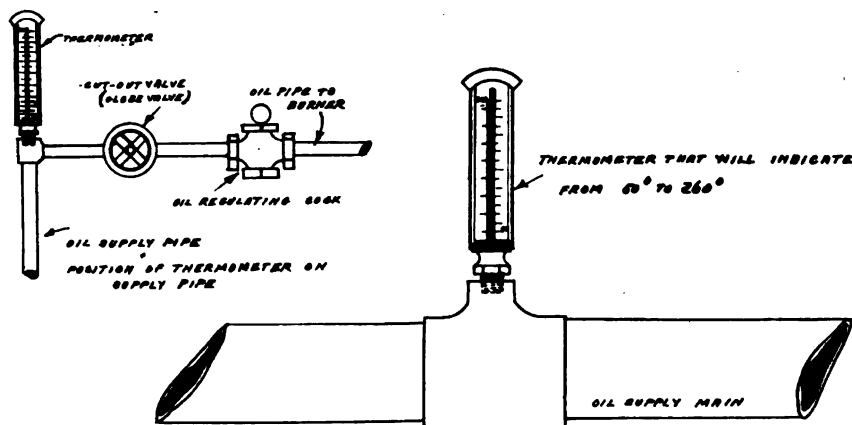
POSITION OF THERMOMETERS ON OIL-SUPPLY MAIN.
